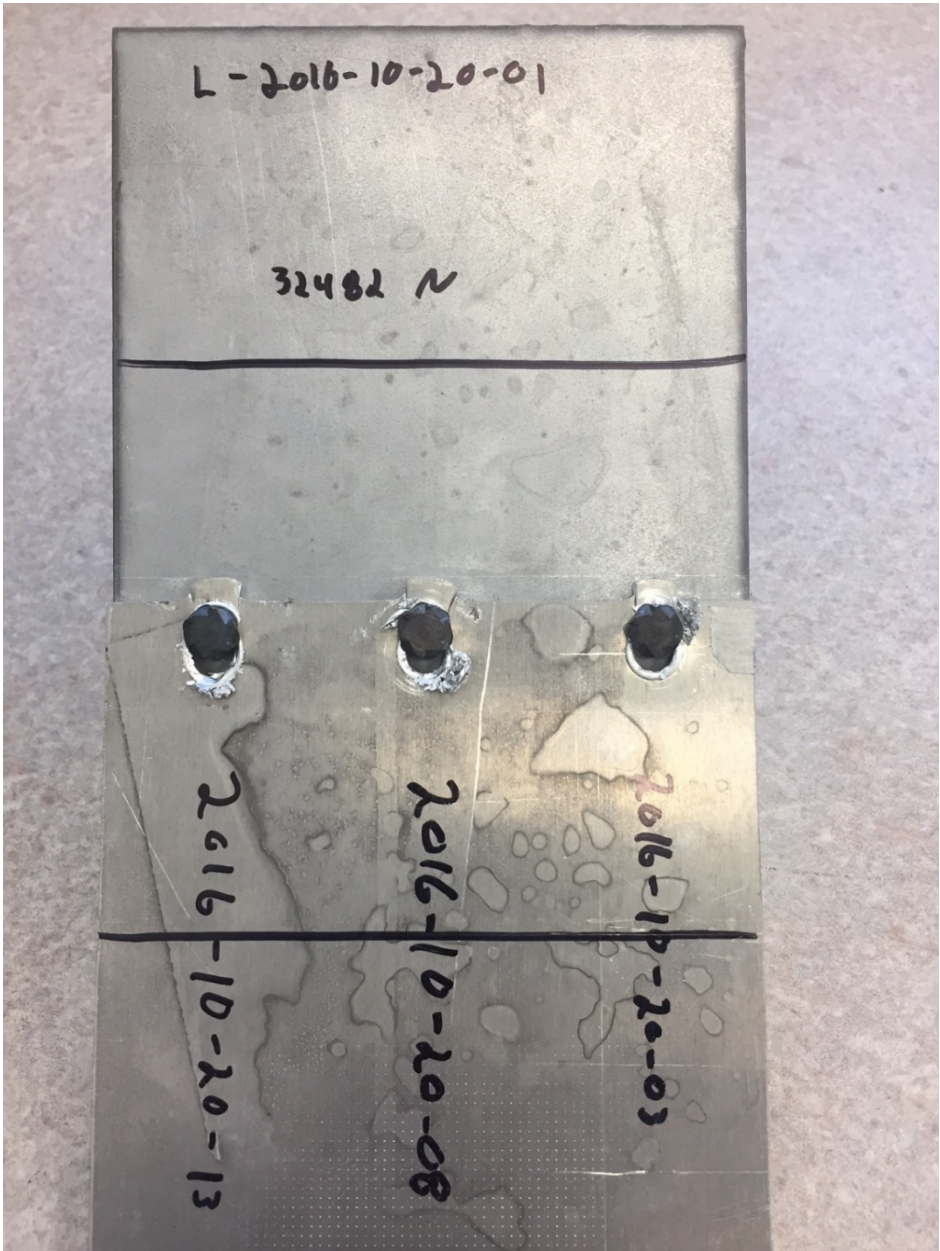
Example of "Good" Welds with Aluminum Only Failure Modes
